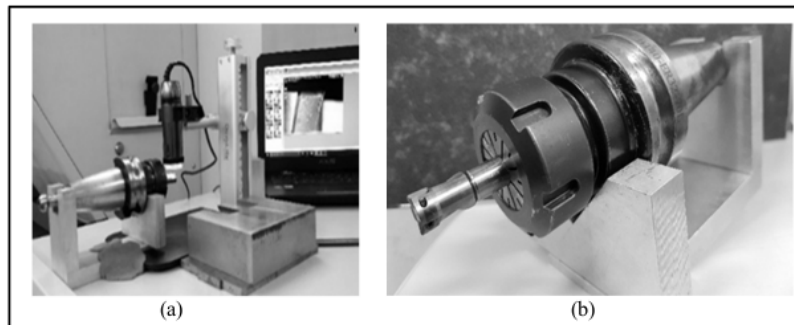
Tool wear measurement setup. (a) Dino-Lite Portable Microscope to measure wear and (b) cutting tool setup
